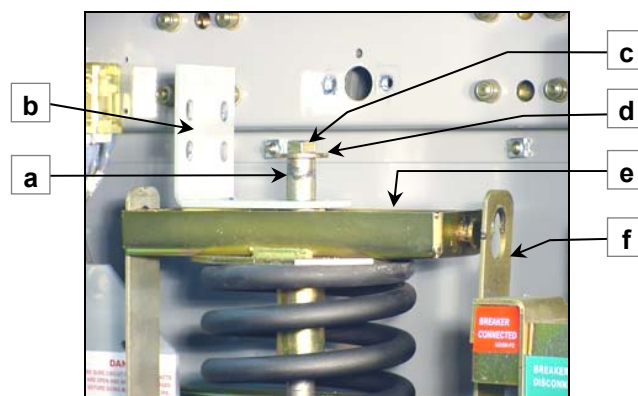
Main Closing Spring Assembly (Compressed for Removal)
